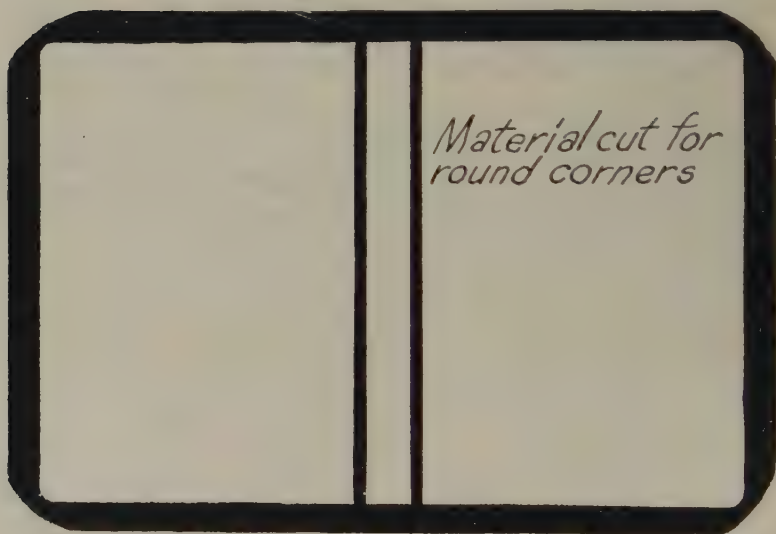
BOARDS AND COVERING MATERIAL CUT FOR
